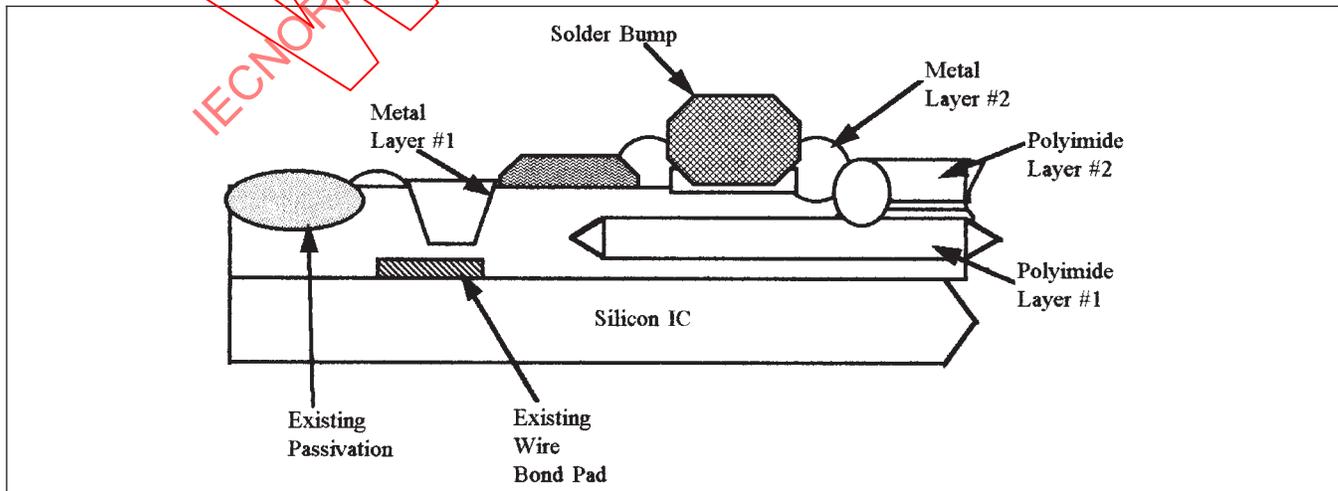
On-Chip Pad Redistribution (Sandia Mini BGA)
